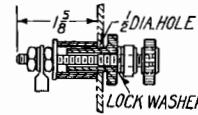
VOLTAGE COIL TERMINAL FOR STEEL PANEL MOUNTING Assembly S#1227184
